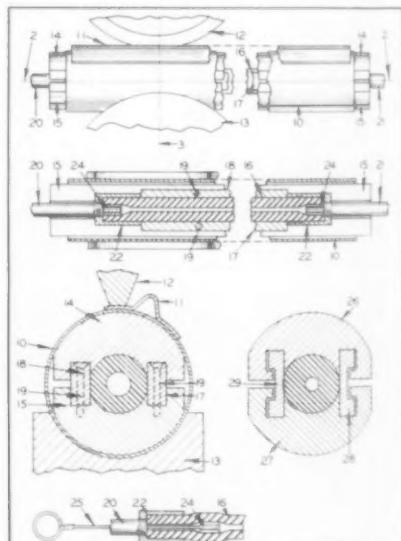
(right) features hydraulic operation, was used to weld drip strip (11) on tube (10). Thin wall of tube made support necessary; hydraulic mandrel was solution. Parts 14, 15, 17, 18 are hard copper machined to fit; part 16 is soft rubber tube held in place by expander (24) pulled in position by rod (25), which is then removed. Connection (22) and tube (20) are held by recesses in parts 14 and 15. Keys 17 and 18 are held rigidly to part 15 but are free to float in part 14 during operation. Mandrel slides into tube; pressure of 800-100 psi is applied. Strip is then welded to tube in two passes between seam welding wheels 12 and 13. Modification shown may be used to weld a lap seam tube where keys 28 and 29 limit travel of mandrel body 26 and 27. Many modifications have proved satisfactory.
